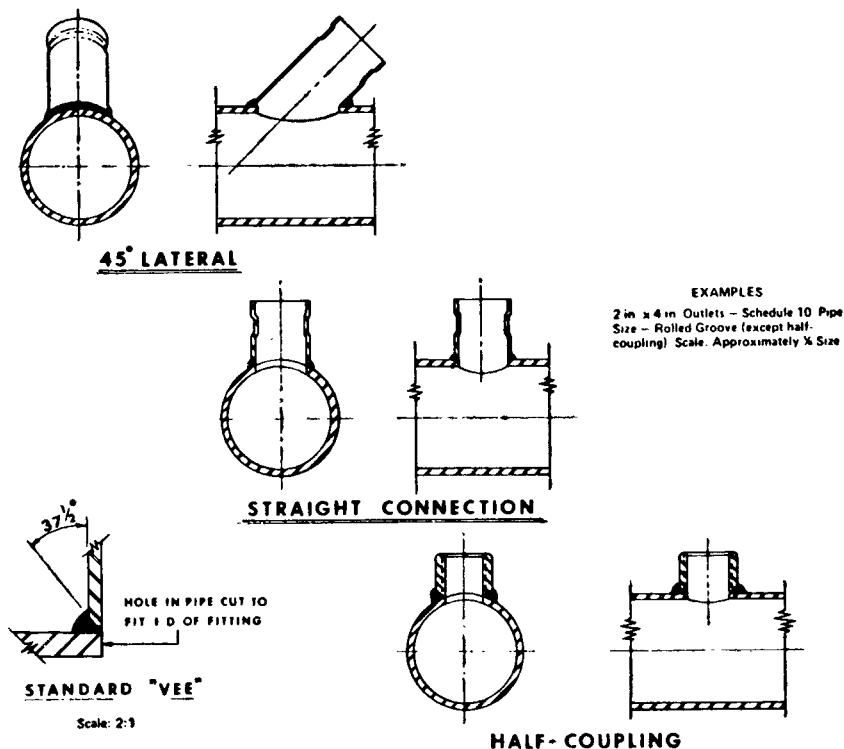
(b) Welded Branch Connections.
